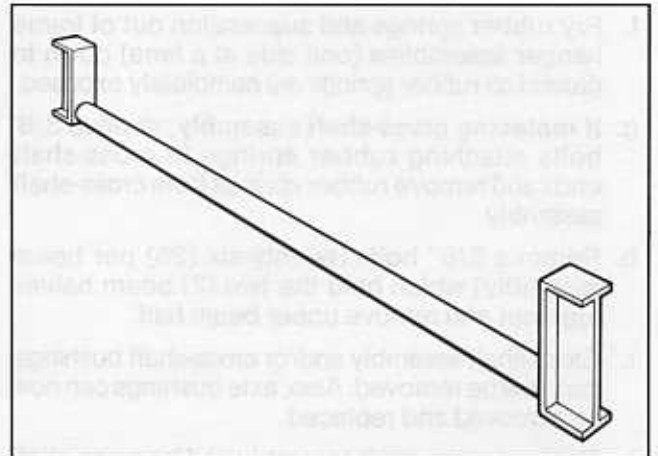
LITE/ryde Tandem Cross-Shaft Assembly
